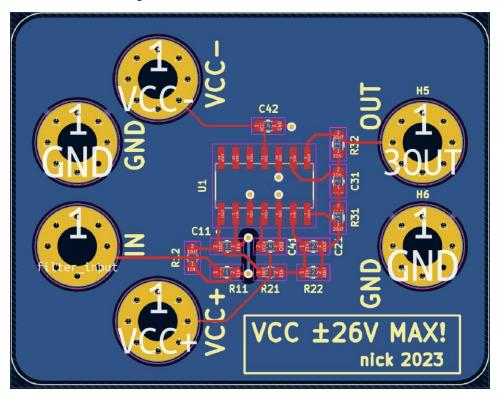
PCB board layout showing solder mask and copper layers drawn in KiCad.
